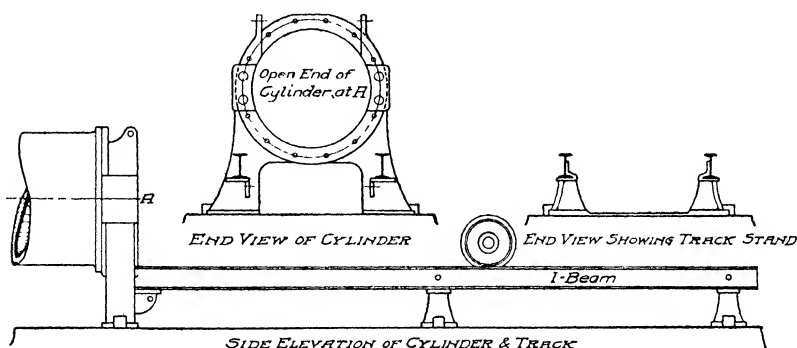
Cylinder and Track Supports for Horizontal Hydraulic Machine
